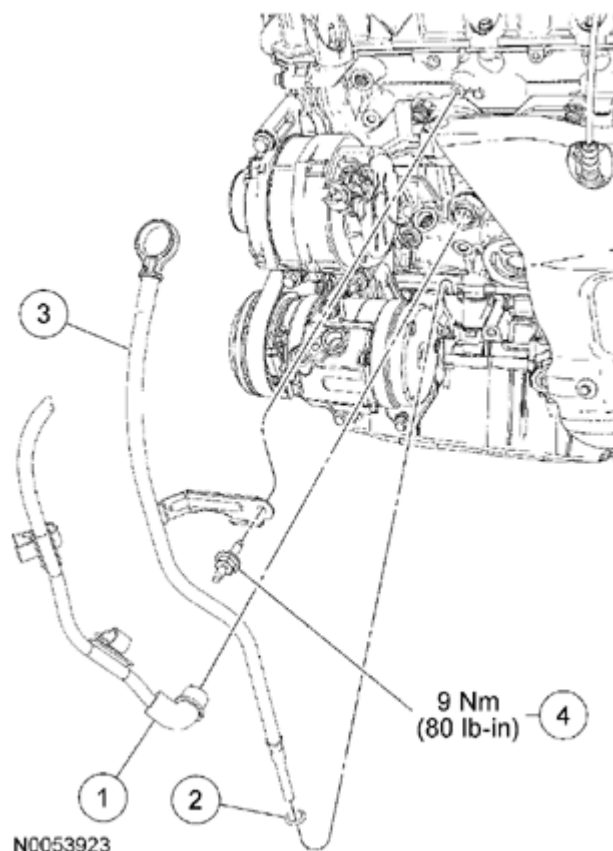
Identifying Oil Level Indicator And Tube Components With Torque Specifications
